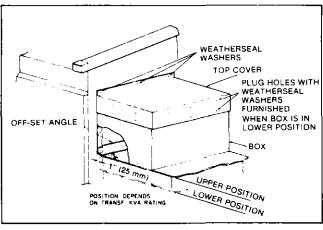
Outdoor Hood Assembly Installed With Weather Seal
